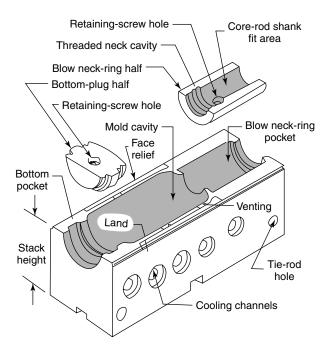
Exploded view of one-half of an injection blow mold, with details of bottom plug and neck ring.
